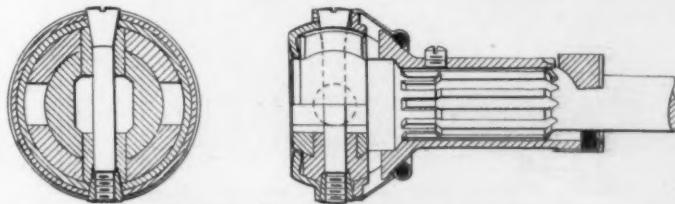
COOPER BALL-AND-SOCKET JOINT. The Socket Is Slotted to Permit Insertion of Drivers That Extend into the Ball, thus Completing the Rotative Connection between the Ball and the Socket. The Ball Fastens Directly to the Shaft from the Gear-Box or the Differential
